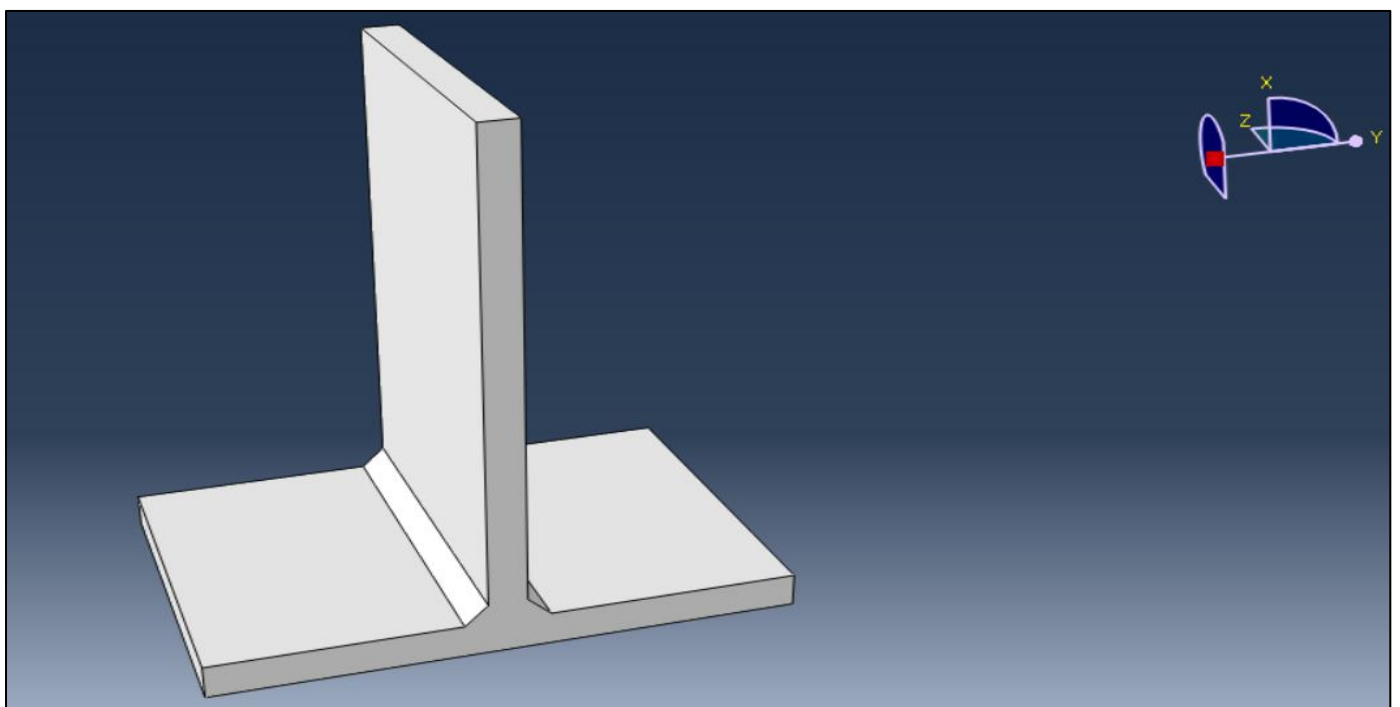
A capture screen from Abaqus illustrating the final T-joint welding plate geometry.
